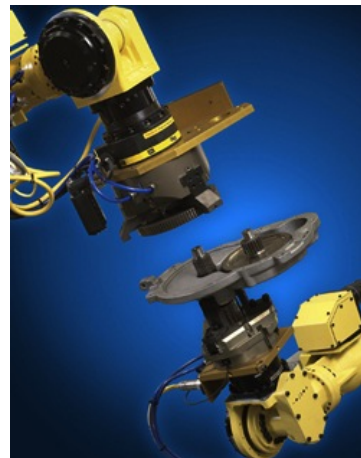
Robots cooperating for assembly (Fanurobotics.com, 2012).
